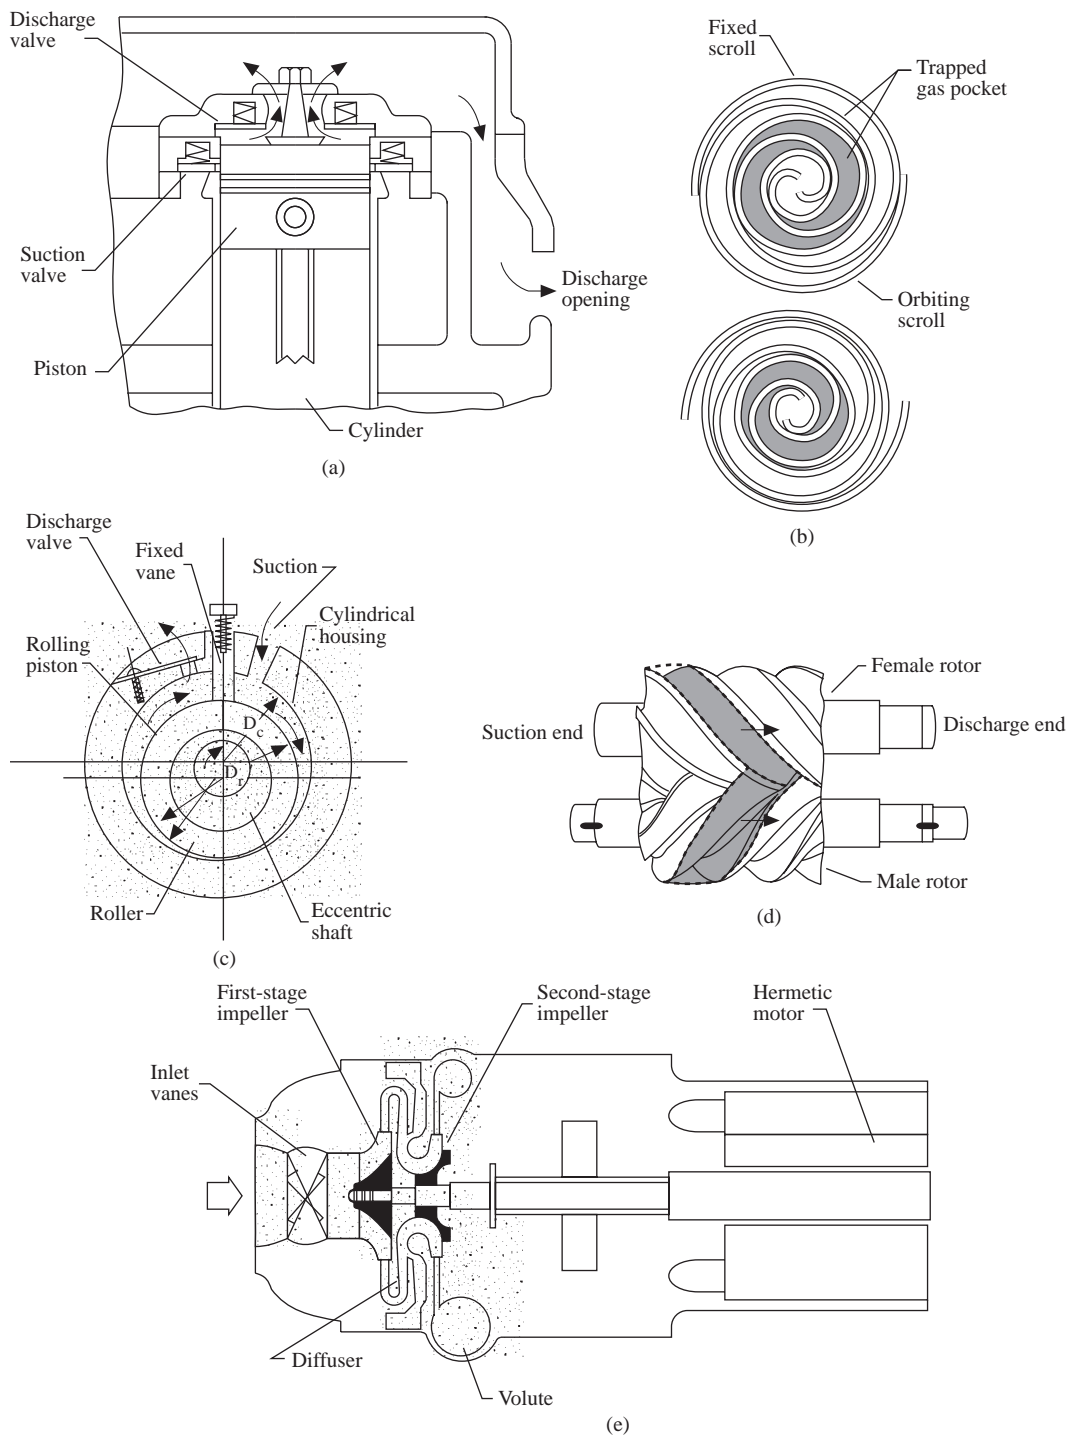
Various types of refrigeration compressors: (a) reciprocating, (b) scroll, (c) rotary, (d) twin-screw, and (e) centrifugal.
